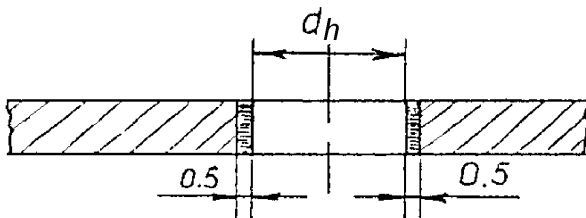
Recommended Sizes of Initial Manufacturing Defects for Thin Sheets
